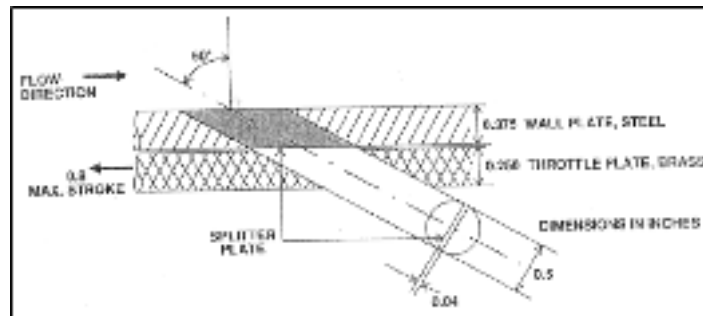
Detail view of the wall perforations in the NRC 5ft wind-tunnel test section.
